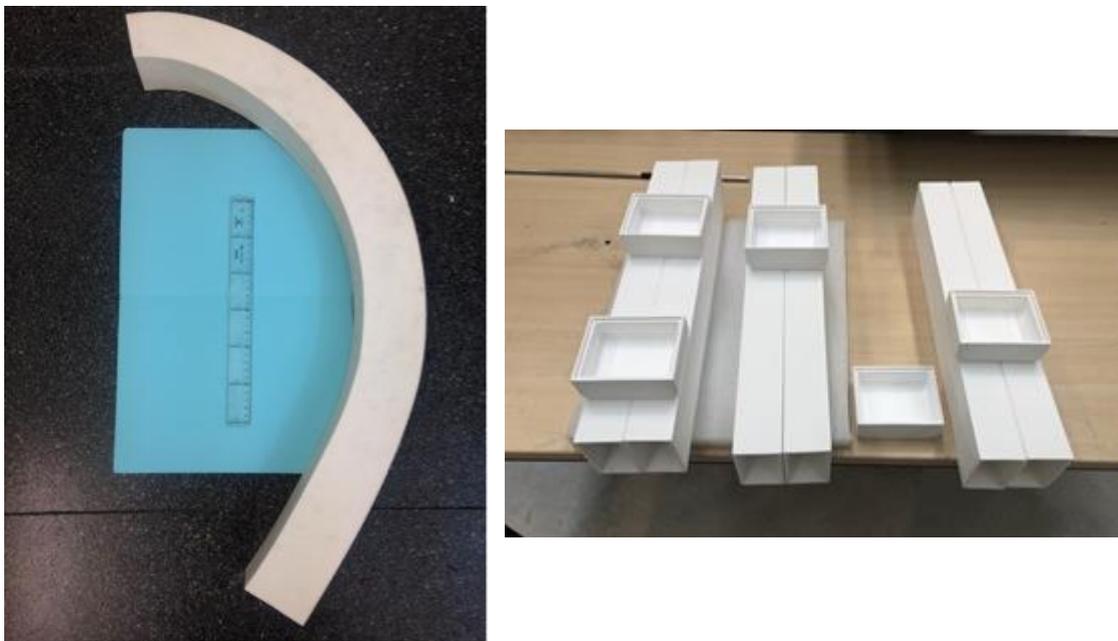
Left) Final sintered banana-shaped FCI; Right) longitudinal alumina mock-ups produced by casting.
